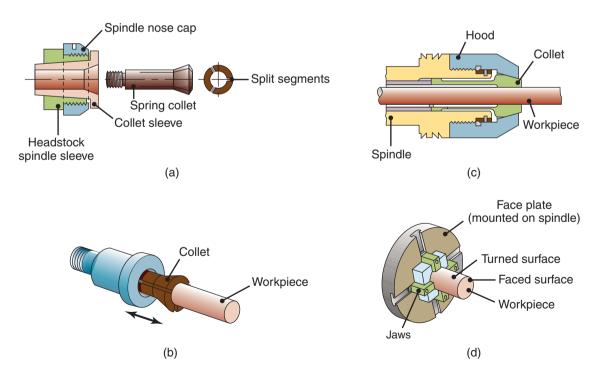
(a) and (b) Schematic illustrations of a draw-in type of collet. The workpiece is placed in the collet hole, and the conical surfaces of the collet are forced inward by pulling it with a draw bar into the sleeve. (c) A push-out type of collet. (d) Workholding of a workpiece on a face plate.
